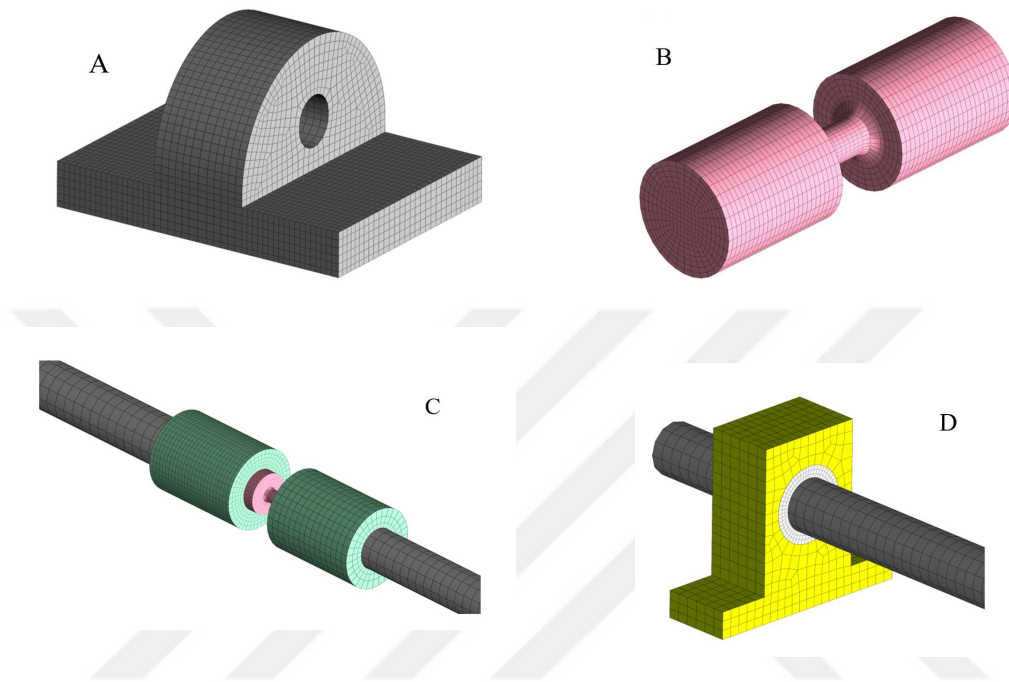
Finite element models of the testing system parts. A: End support, B: Specimen, C: Specimen – Bar interface, D: Linear bearing.
